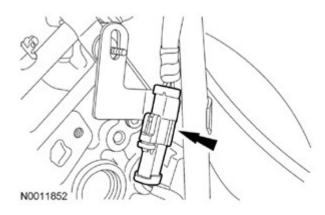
Identifying Fluid Level Indicator And Rear Heater Hose Hanger Courtesy of FORD MOTOR CO.
